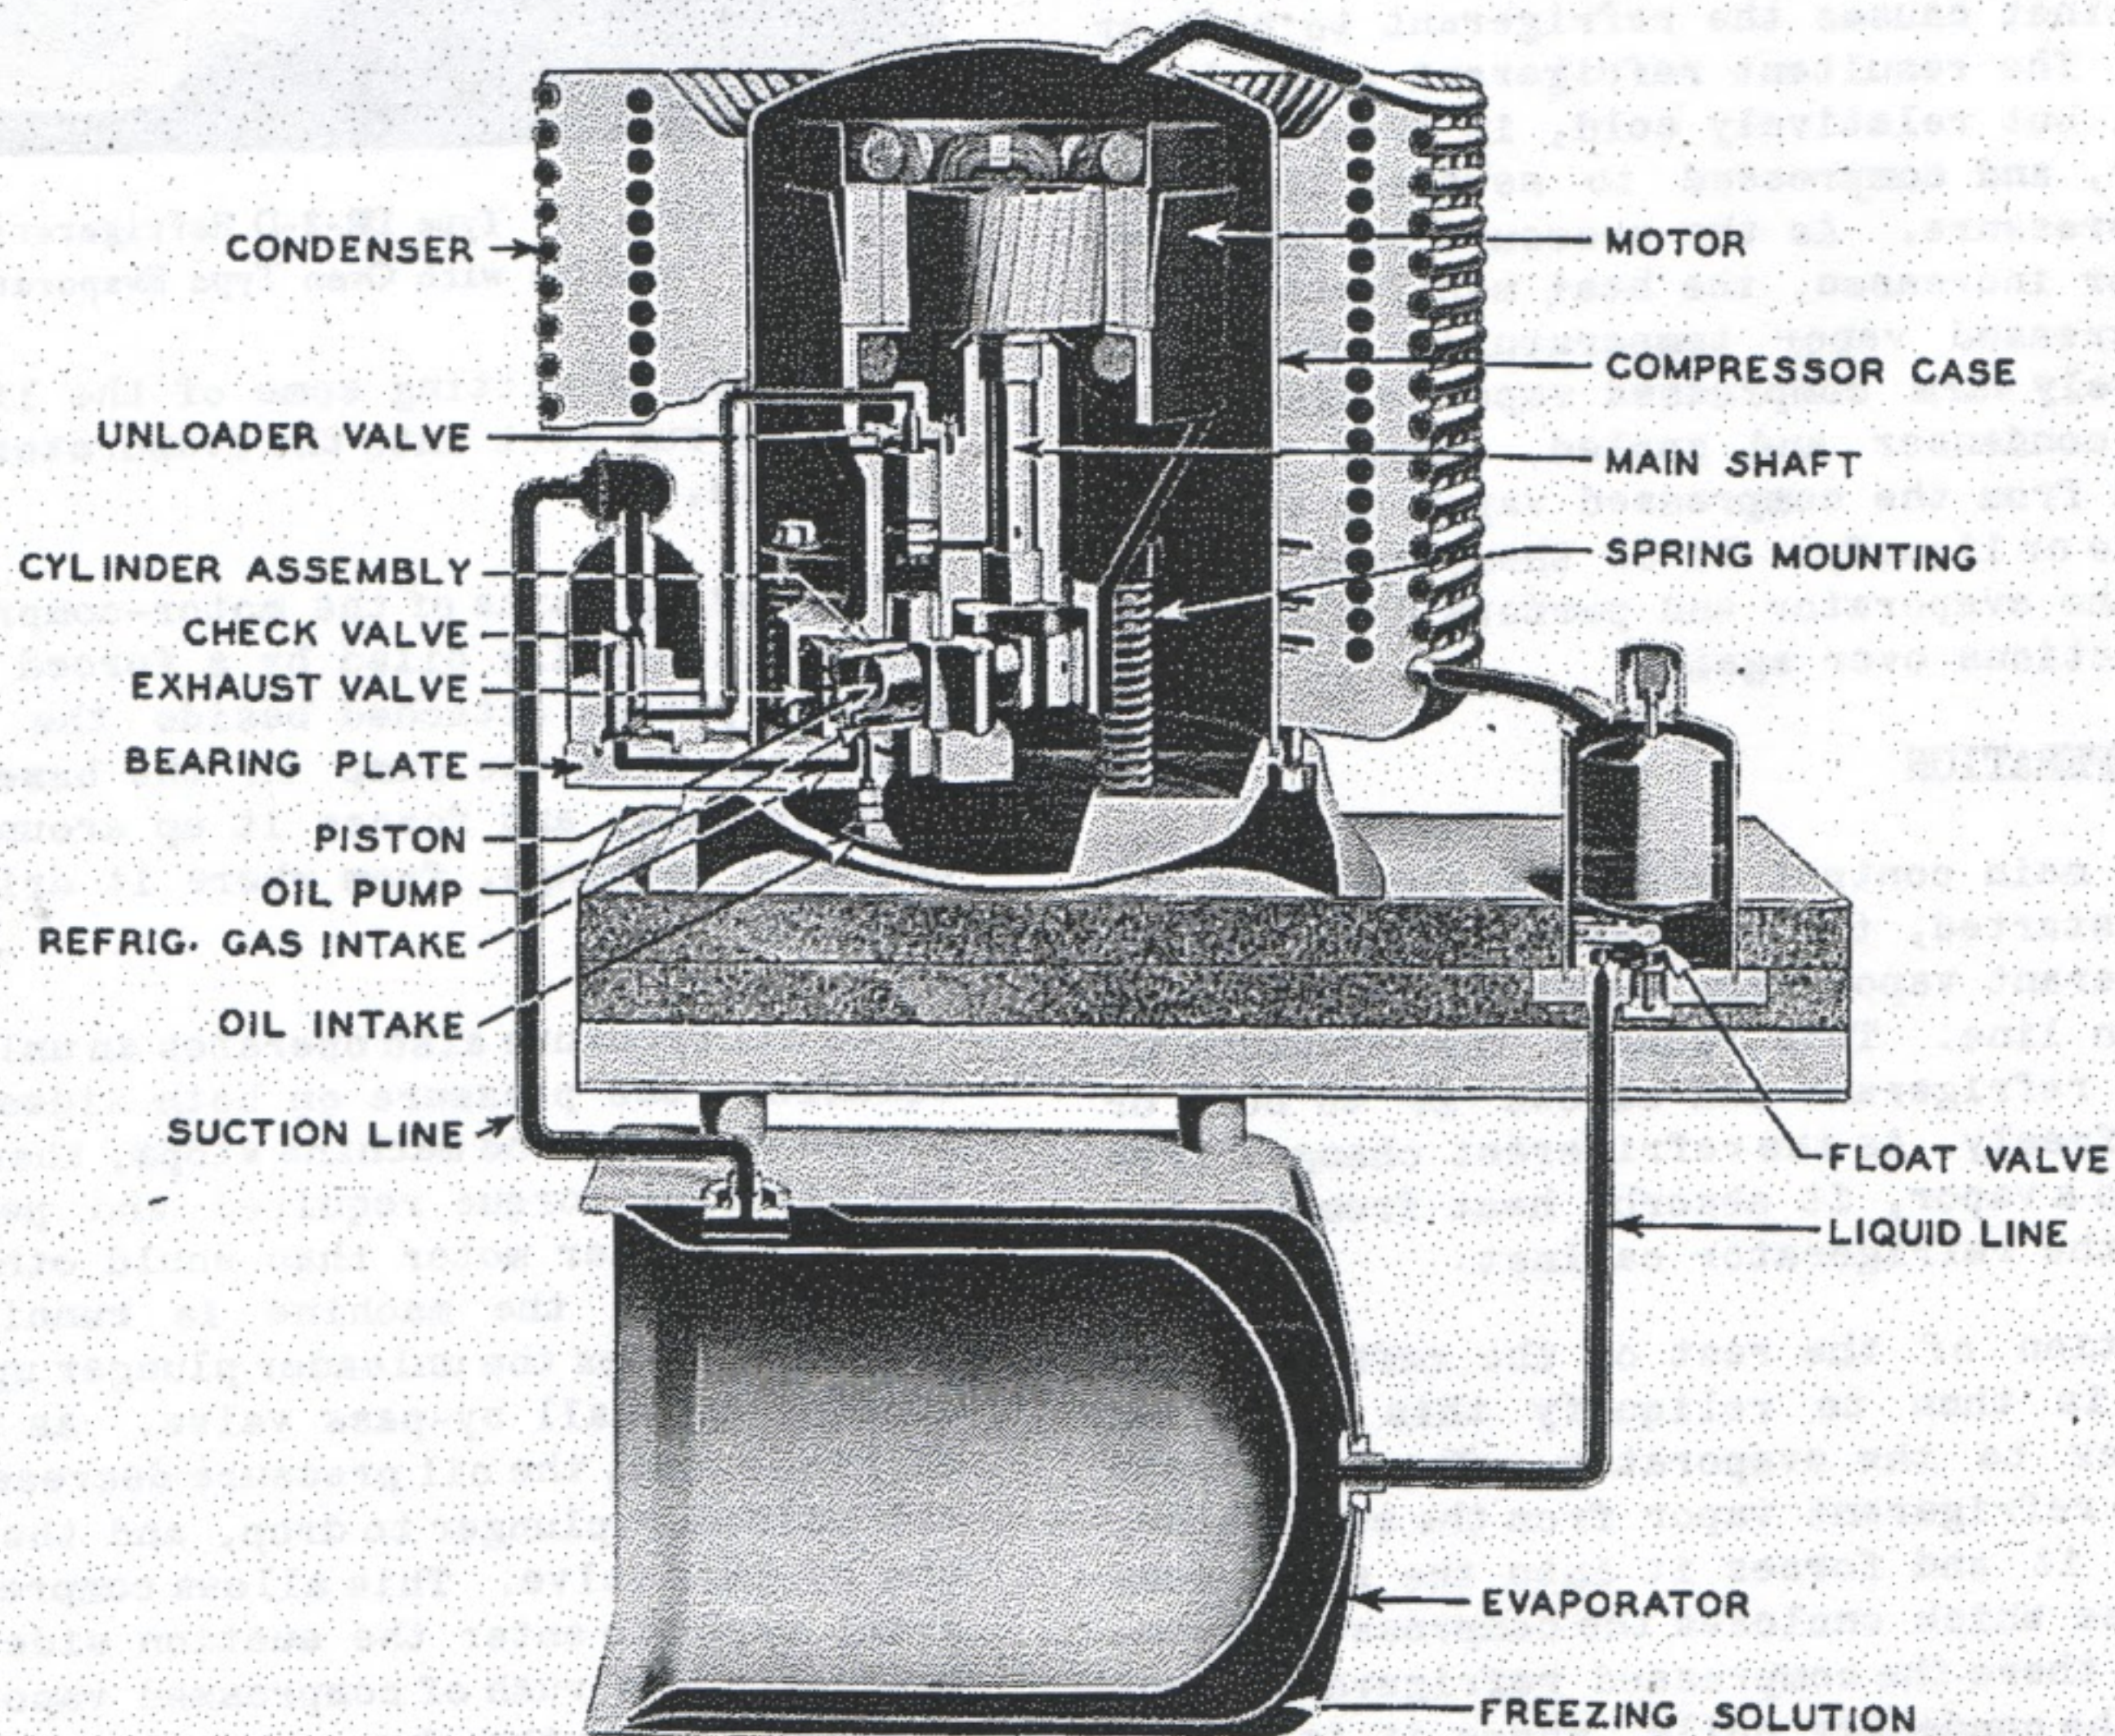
Schematic Diagram of Type DR Refrigerating Machine
